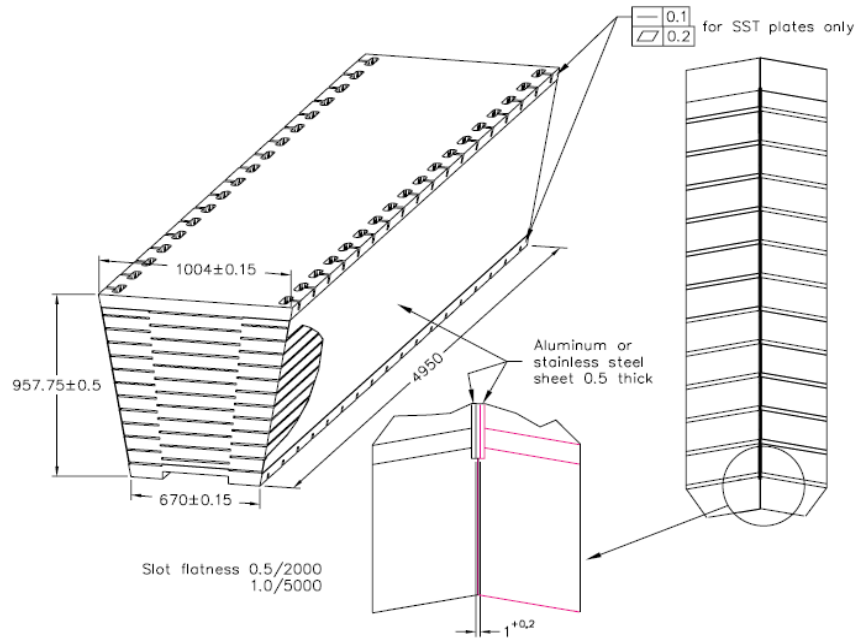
View of the HB wedge showing scintillator sampling design [11].
